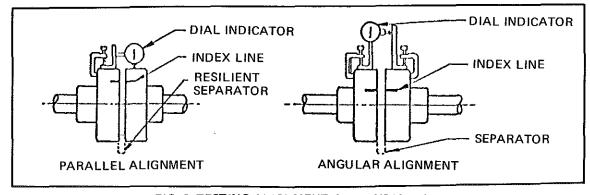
TESTING ALIGNMENT, DIAL INDICATOR
